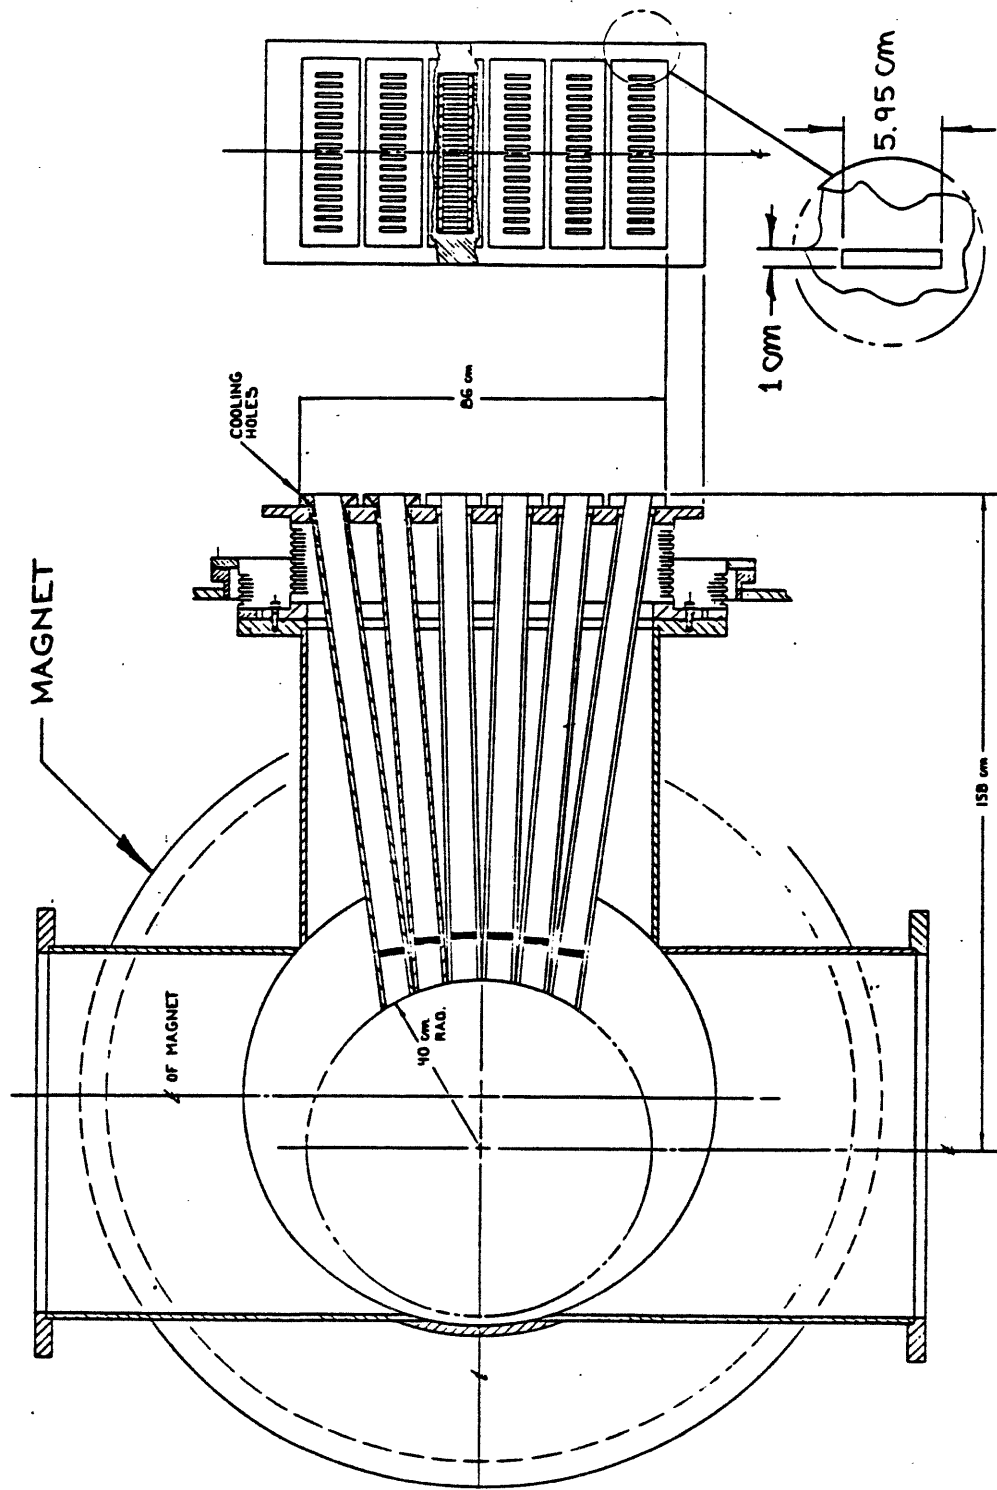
Schematic drawing of the Alcator C 16 waveguide lower hybrid coupler.
